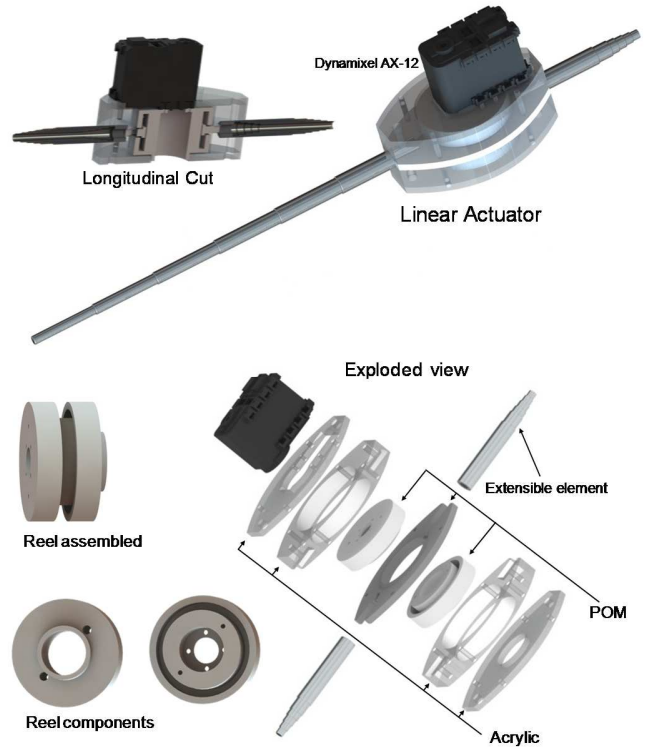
Different views of the design and components used for the construction of the electric linear actuators. The robot can be easily reproduced using digital fabrication techniques, such as laser cutting and 3D printing.
